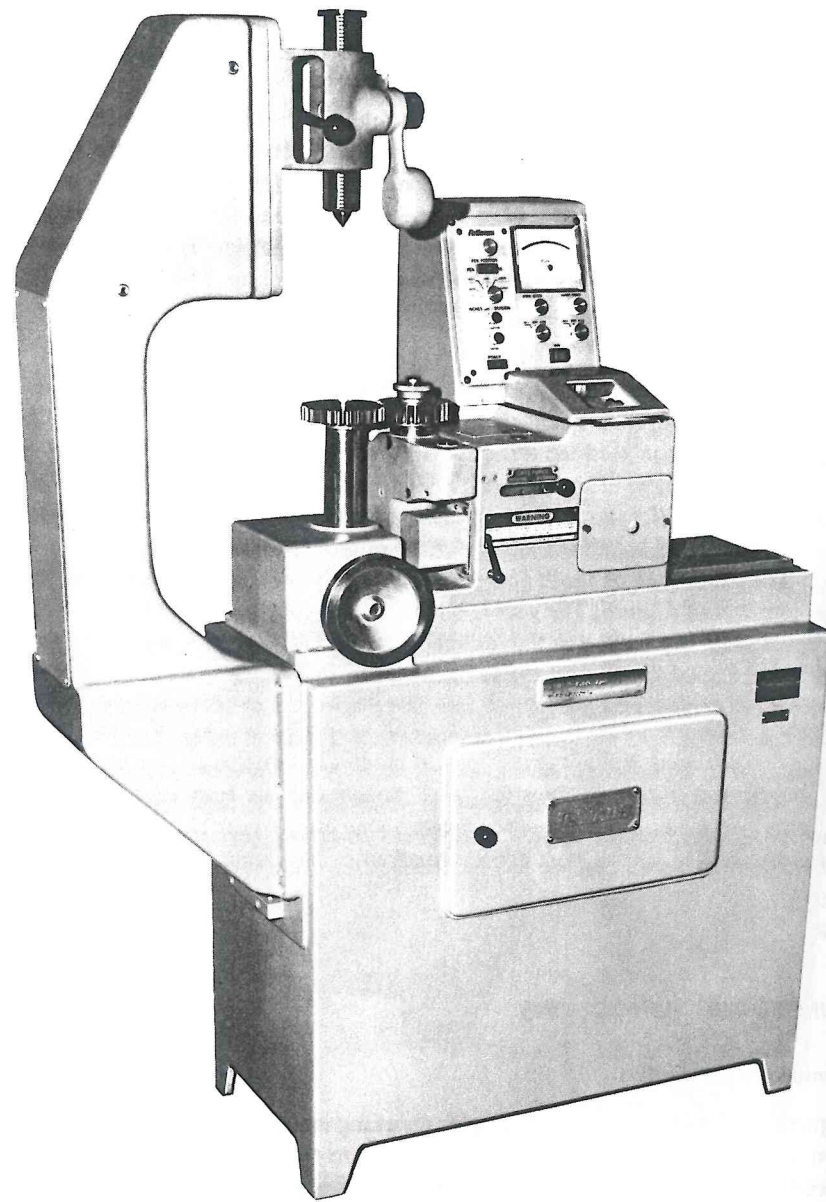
Composite gear checking machine. (Courtesy of Fellows Corporation, Springfield, Vt.)
